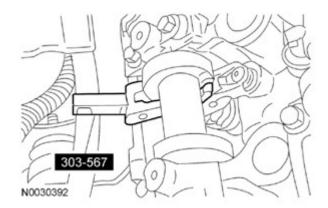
Compressing Valve Spring Using Valve Spring Compressor Courtesy of FORD MOTOR CO.
